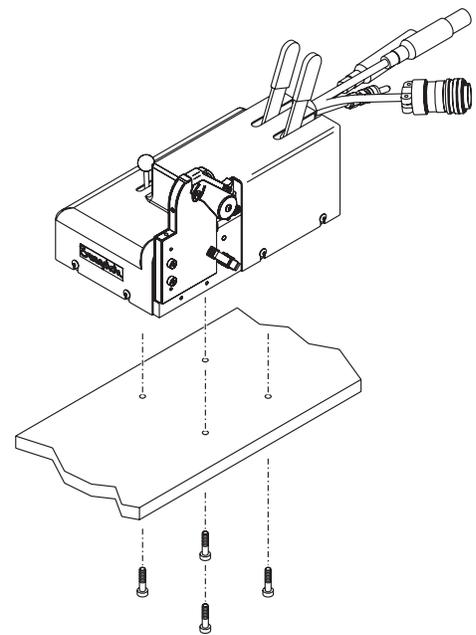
Optional Mounting of the Weld Head to the Bench
